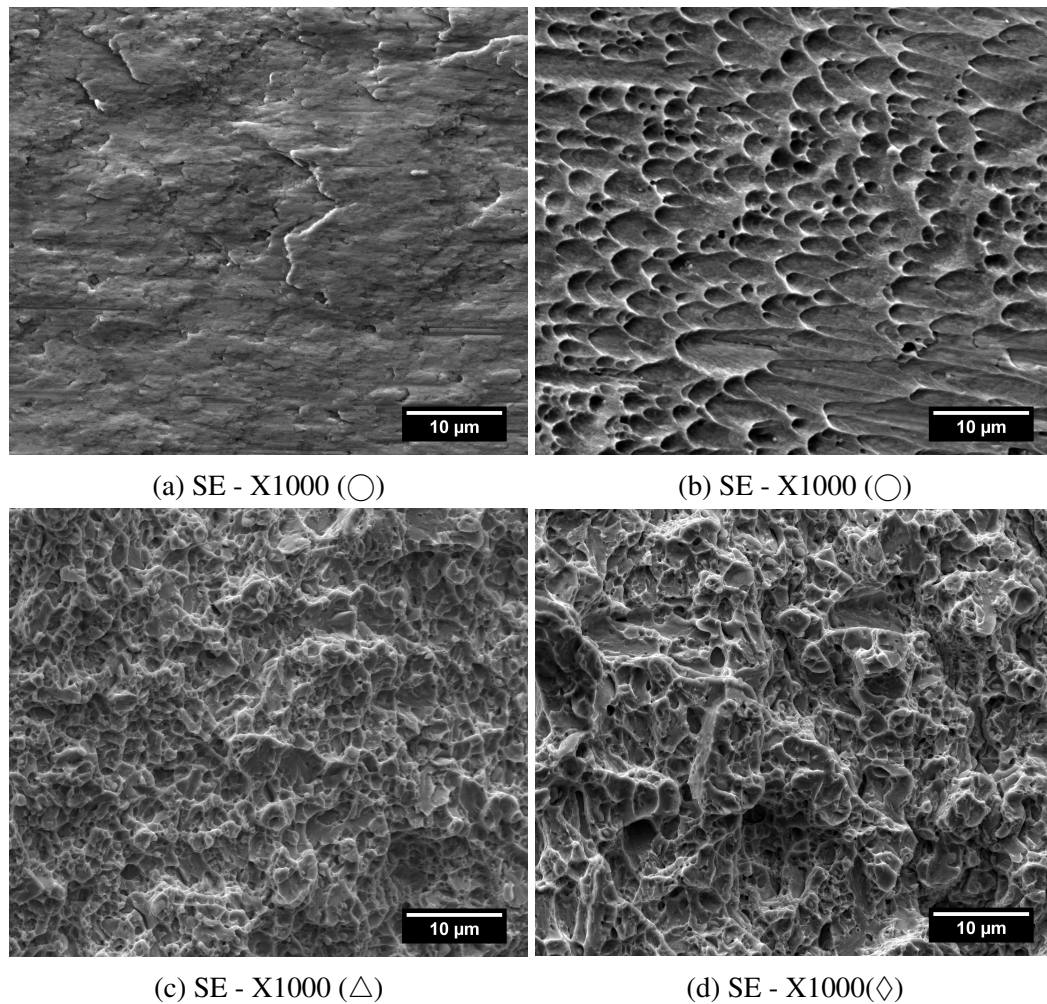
Photo of Carmo side press fracture surface
